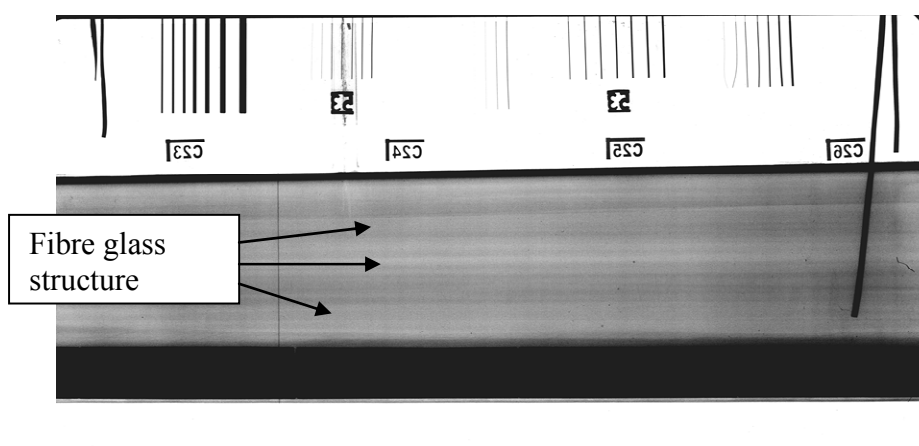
Front Edge of the Ka-26 Helicopter Rotor Blade Revealed by XR.
